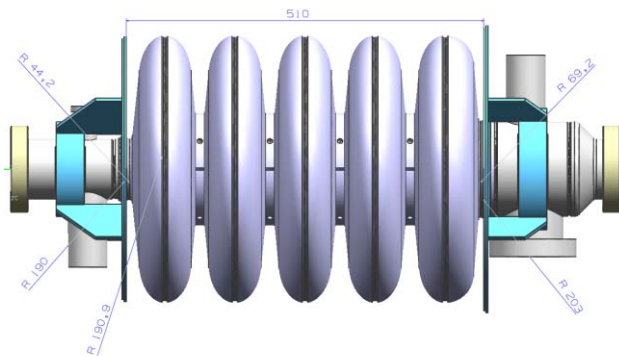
Lateral view of the TRASCO cavity, indicating the main geometrical constraints for the shield design.
